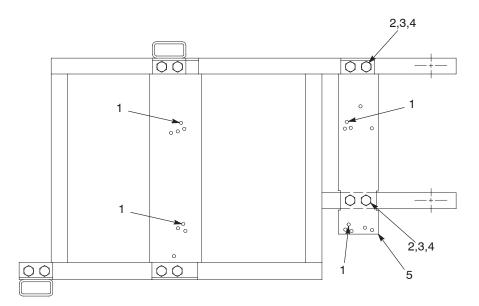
Series 2300/FM-130 mounting bracket bolt pattern
